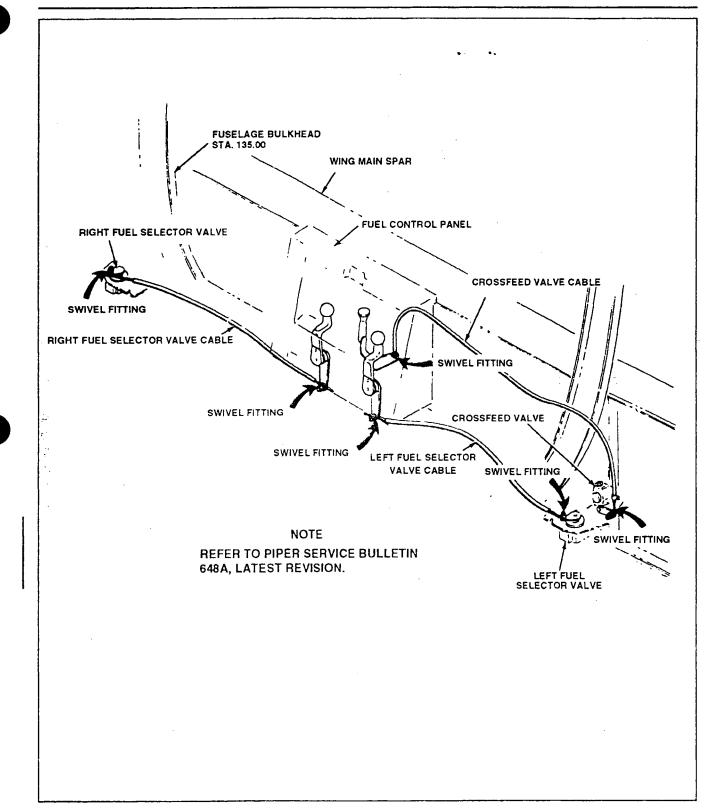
Fuel Selector and Crossfeed Valve Control Cables
